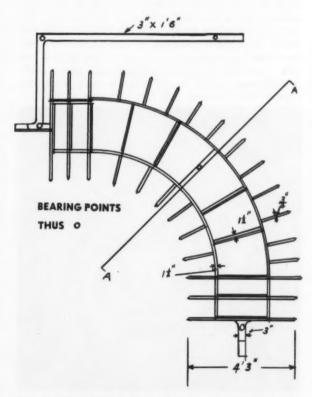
Core arbor for bend pipe, showing balancing arm at top of drawing.
